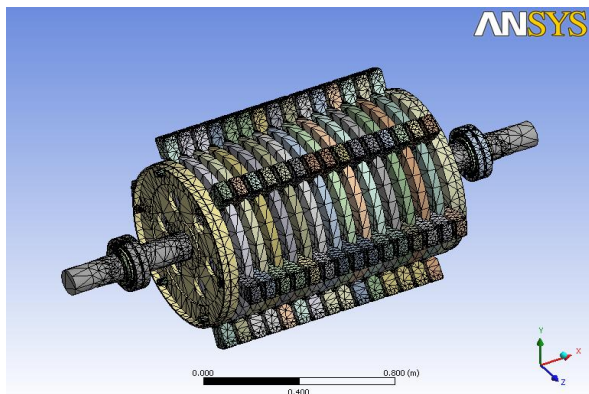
Rotor Shaft Assembly Mesh in Ansys
